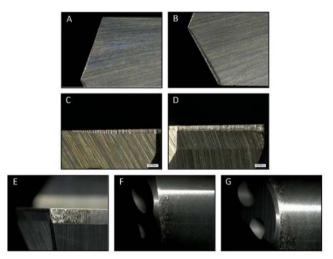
Stable tool wear on gun drill tip, (a) Crater wear on inner cutting edge (b) Crater wear on outer cutting edge (c) Flank wear on inner cutting edge (d) Flank wear on outer cutting edge (e) Side margin wear (f) Lower bearing pad wear (g) Upper bearing pad wear (see online version for colours) [10].
